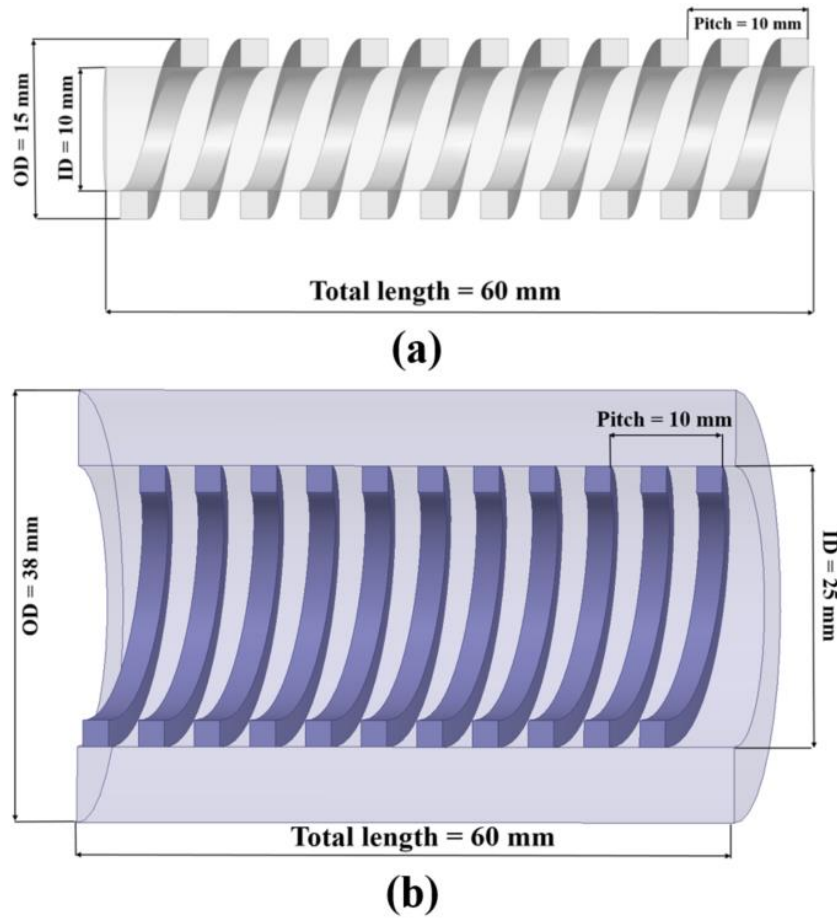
Fixture cross section of (a) mild steel inner core, (b) Tufnol outer core.
